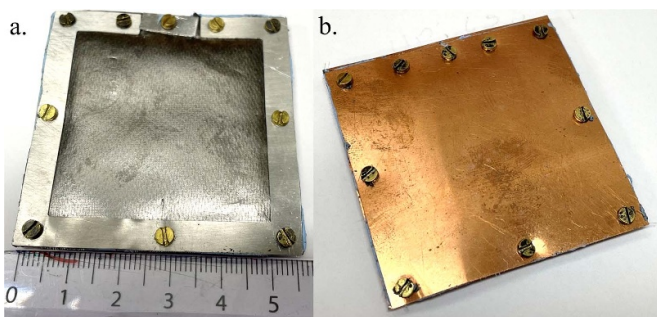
(a) Final assembly of a graphene-enhanced vapor chamber using the gasket sealing method. (b) Final assembly of a copper vapor chamber using the gasket sealing method.
